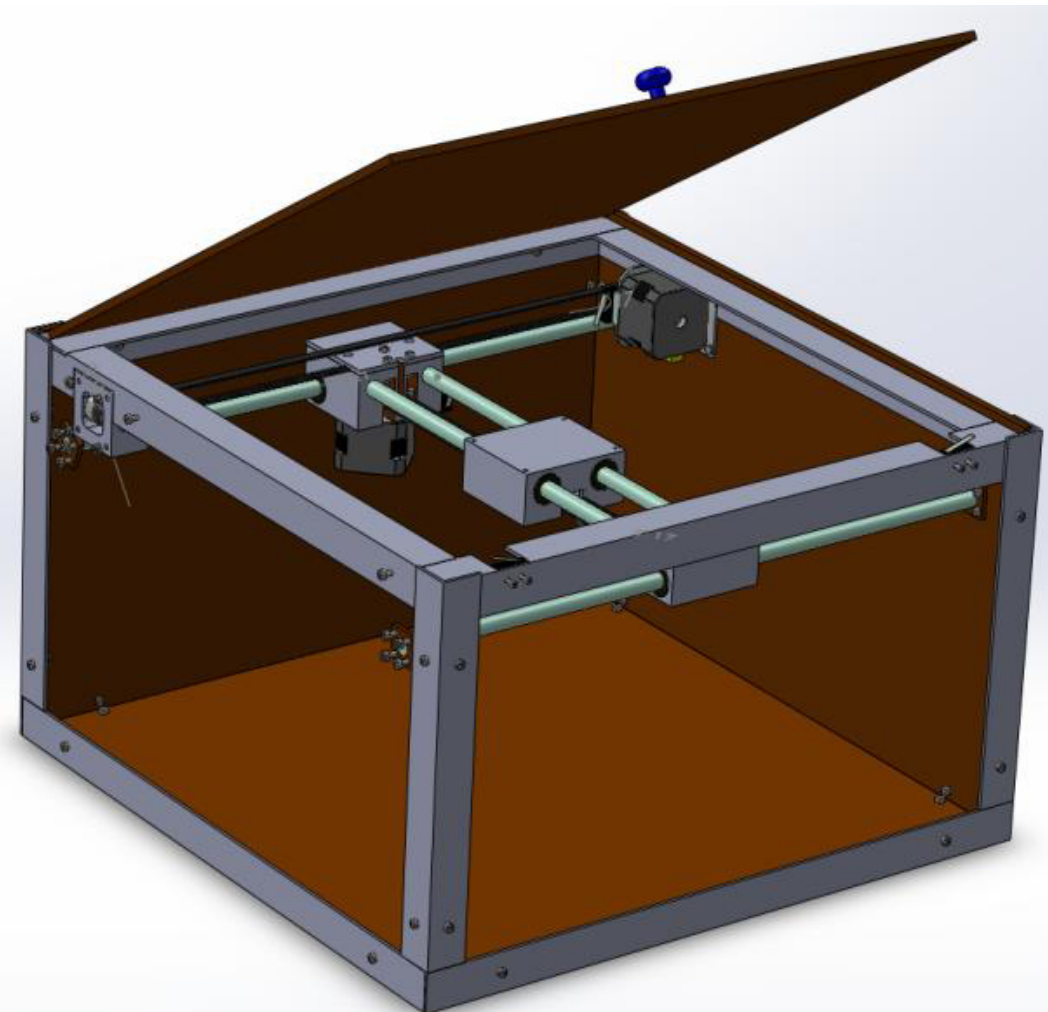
'Assem 1'. A view of the gantry in the housing.
